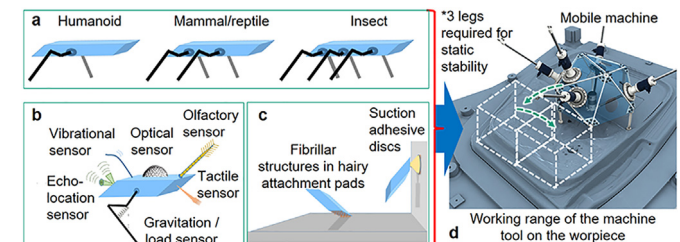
Insect-based bio-inspiration for the mobile machine tool, a) stability and mobility, b) sensors and control system, c) mounting and adhesion, d) Mobile machining unit fixed on the large workpiece according to [241].
